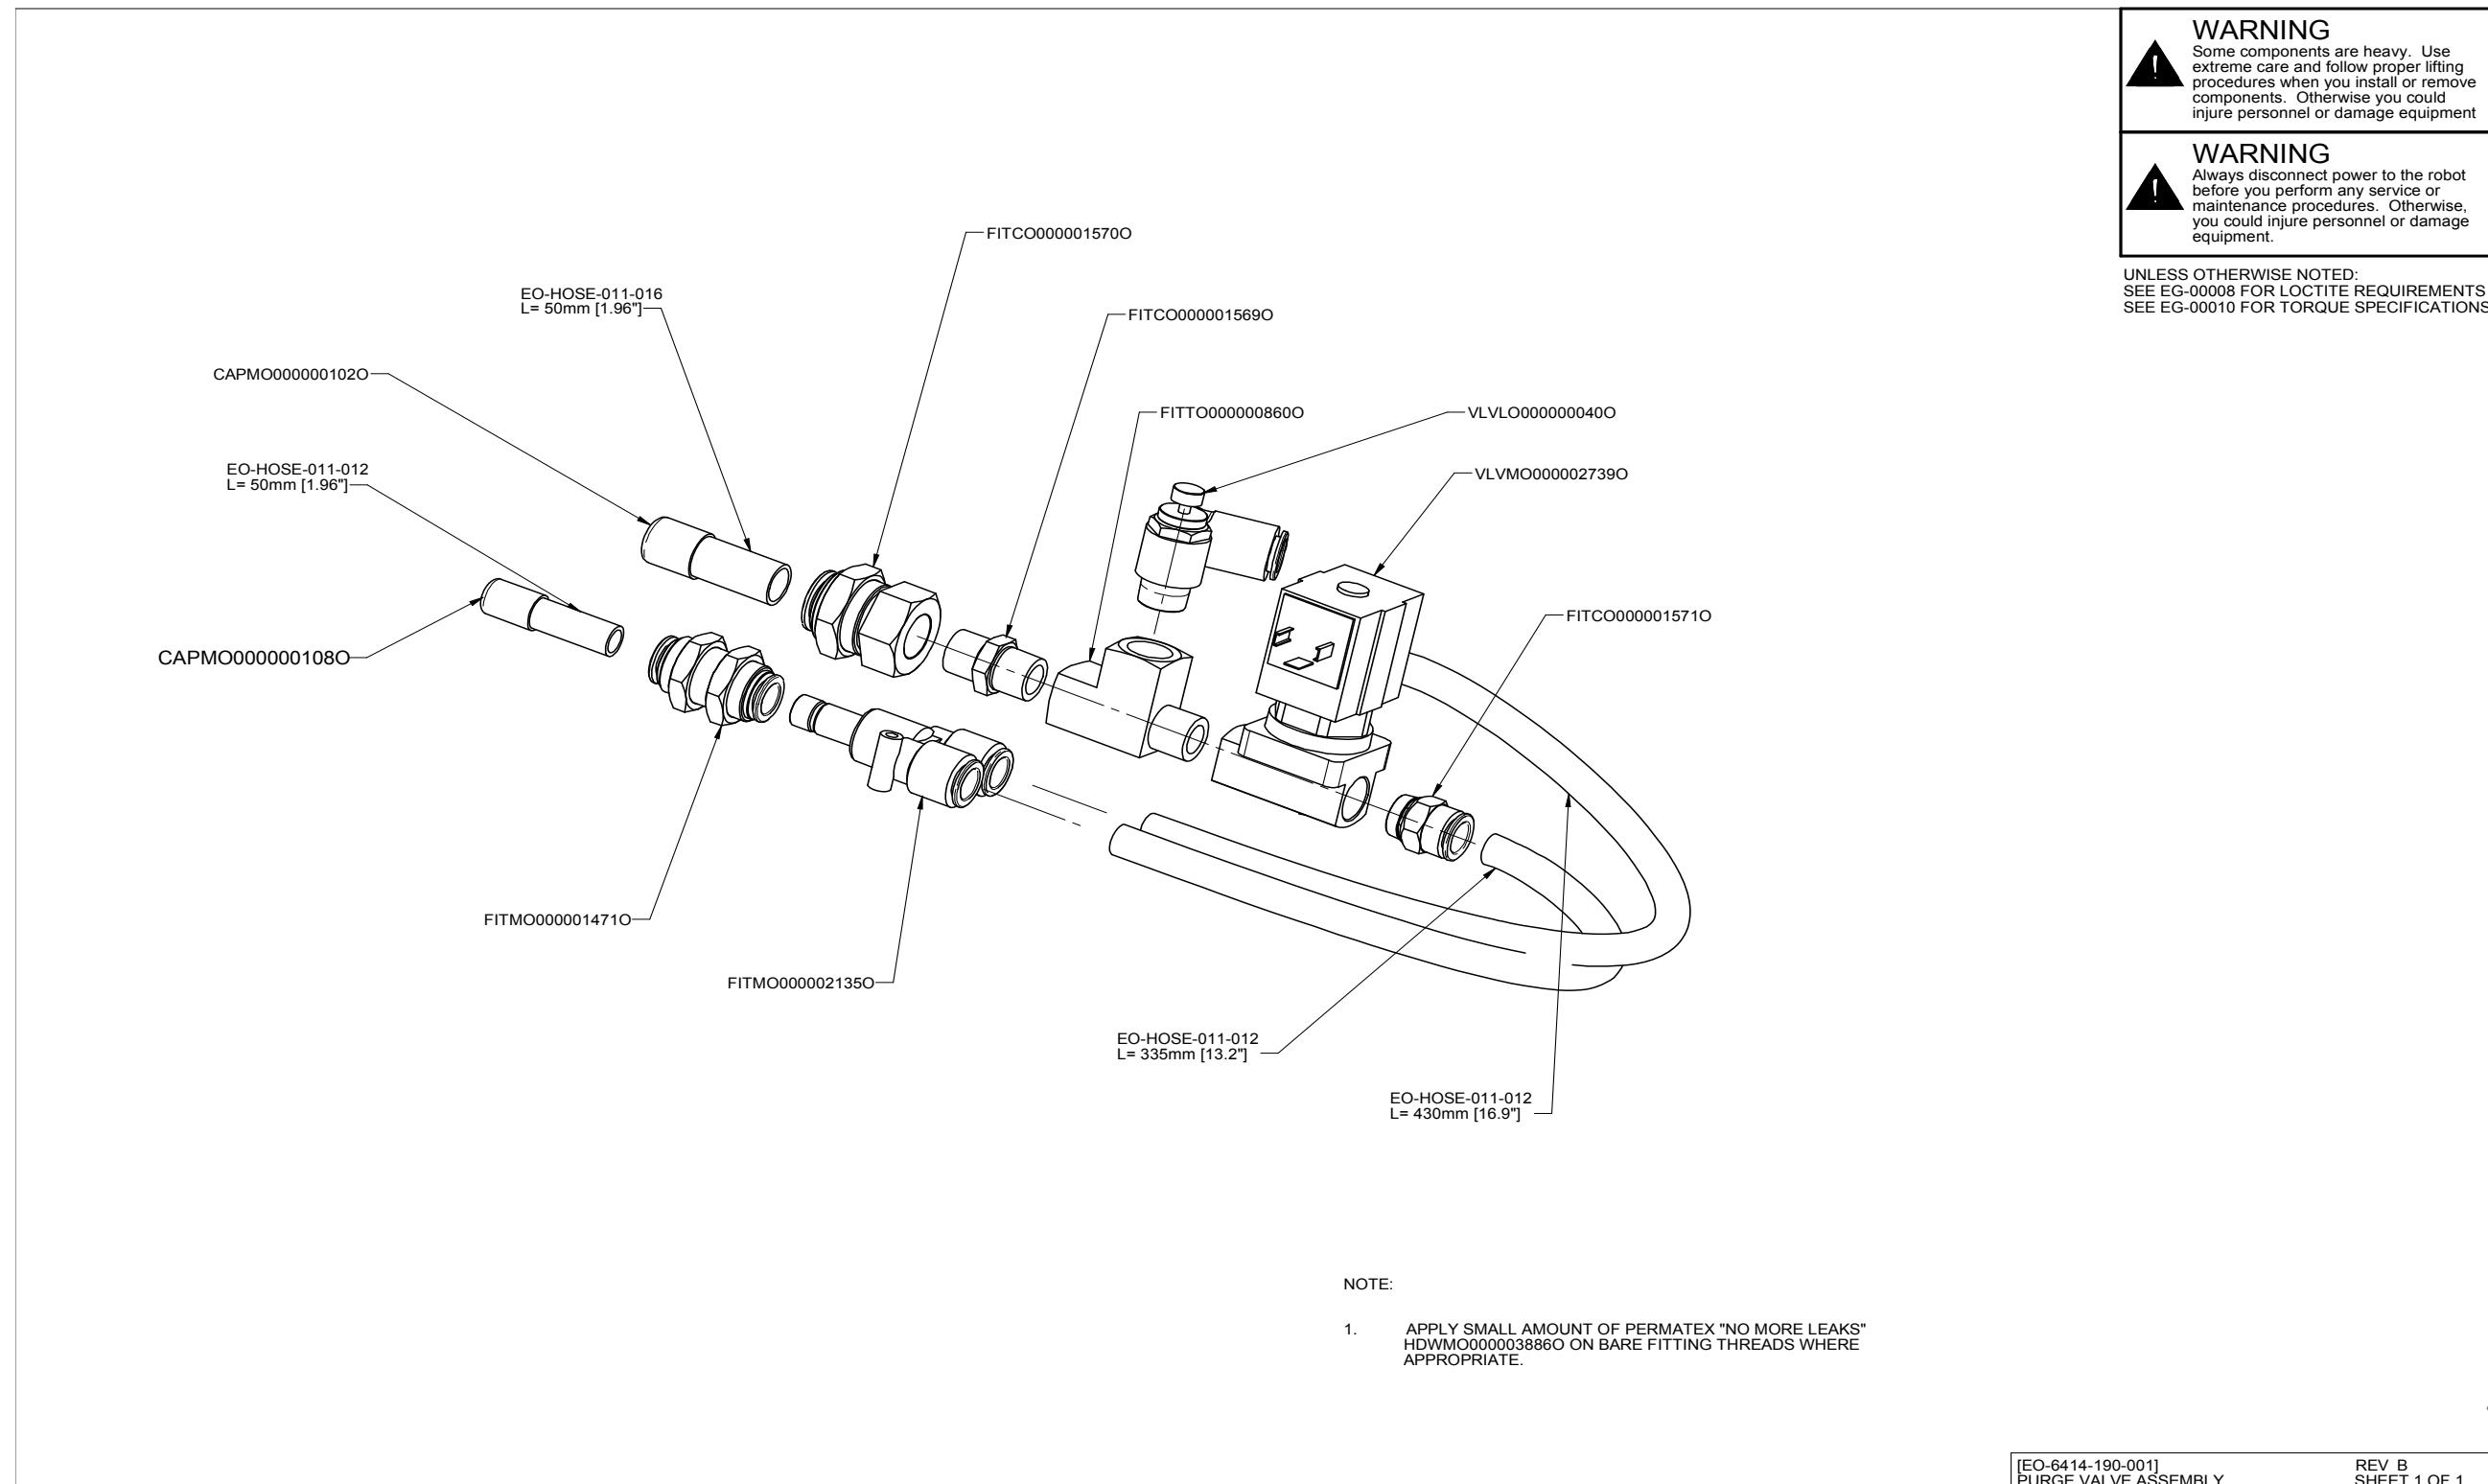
EO-6414-190-001, PURGE VALVE ASSEMBLY
